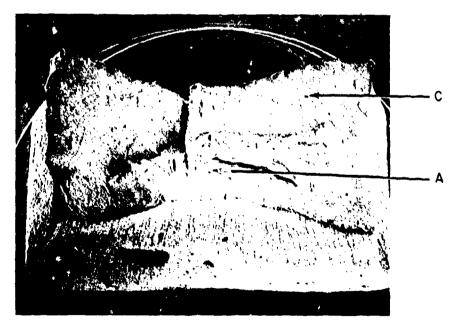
Tensile fracture surface of an HY-130 steel specimen, 8x.
